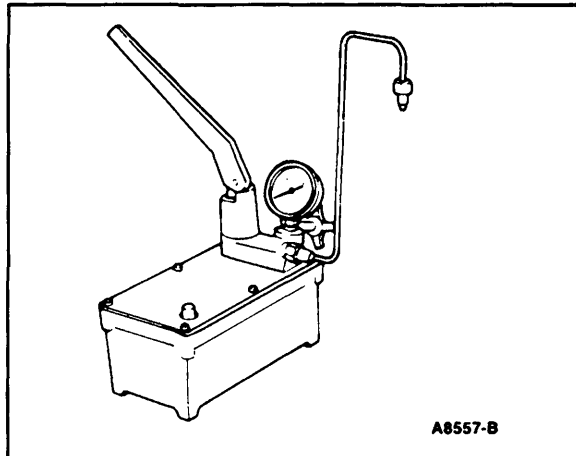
Rotunda 014-00300 Injector Nozzle Tester Special Service Tool D83T-9000-F
